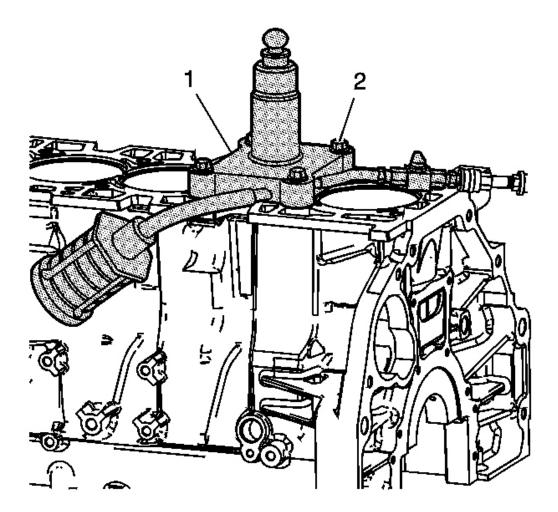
Placing Trim Tool Assembly EN 45680-411 Onto The Cylinder Courtesy of GENERAL MOTORS CORP.
